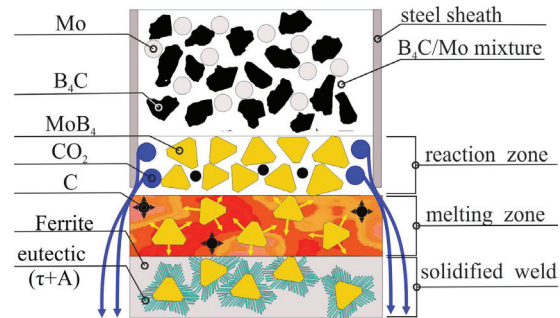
Schematic formation of a surface layer when welding with flux-cored electrode materials with a reaction mixture of Mo/B_4C
